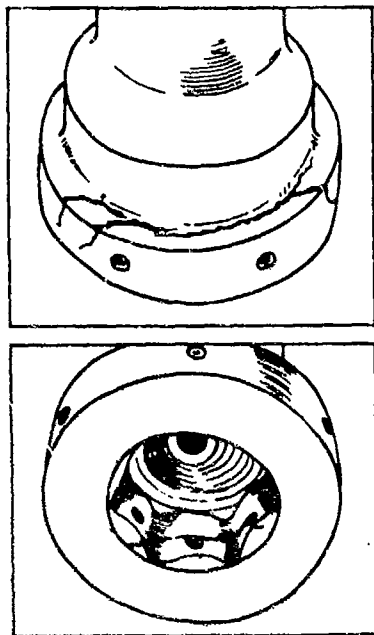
Close-up views of magnaflex indications, showing location and extent of brittle failure in the head of turboprop engine mount attachment bolt (210 ksi) which had been incompletely baked after having been tin plated to a thickness that was much greater than that normally used.
